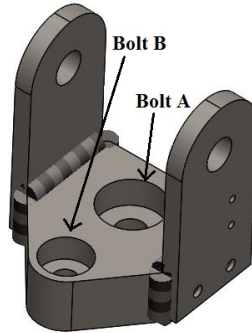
Outboard cylinder mount showing the locations of bolt A and bolt B.
